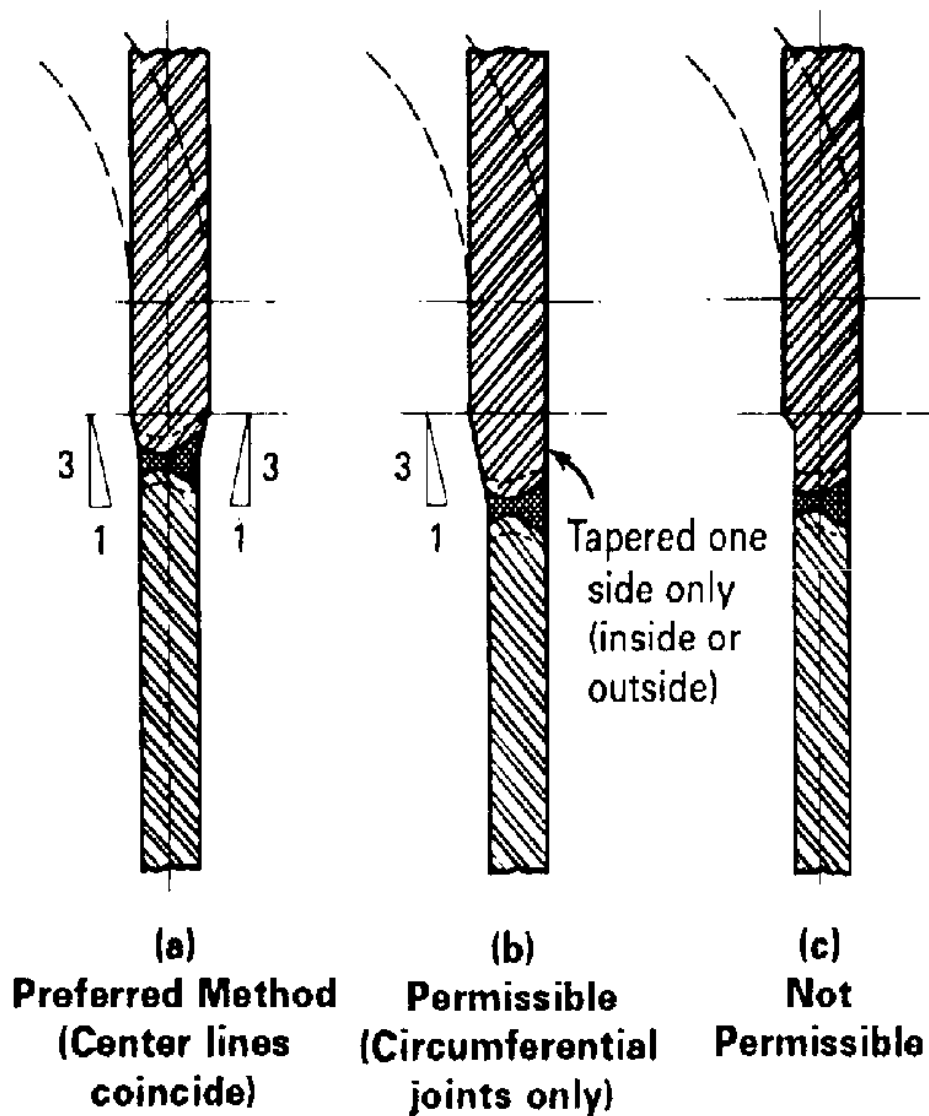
BUTT WELDING OF PLATES OF UNEQUAL THICKNESS
